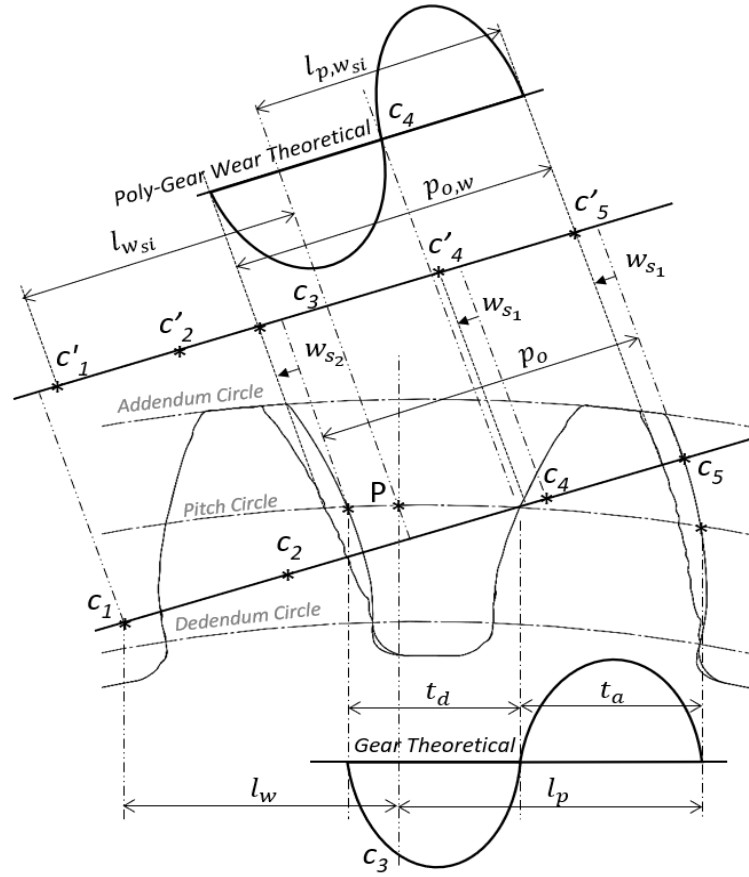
2 *Involute Tooth Gear Geometry and Ball Contact (Unworn and Worn Teeth)
